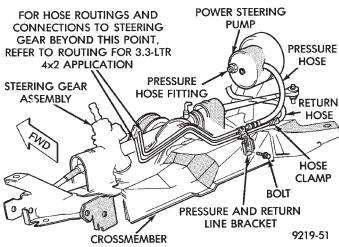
Power Steering Hose Routing 3.3L A.W.D.
